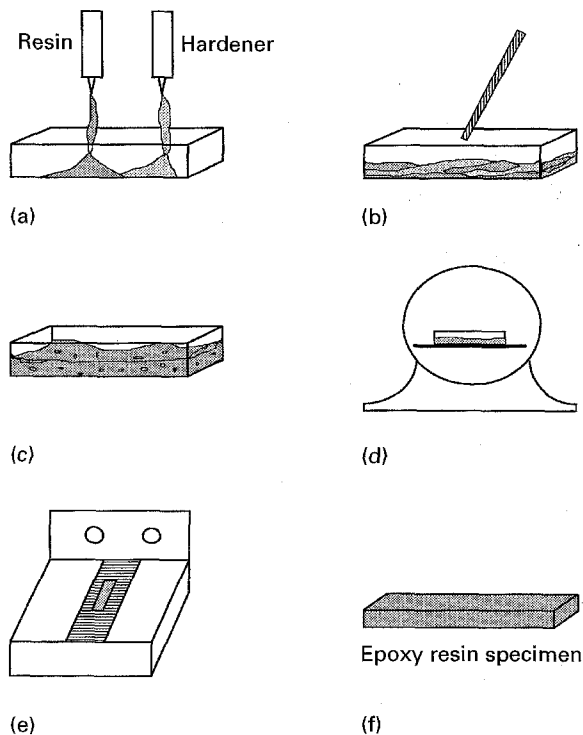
Schematic drawings showing the fabrication process for epoxy resin specimen: (a) squeezing resin and hardener into the mould, (b) mixing, (c) uncured epoxy resin containing pores, (d) removing pores by vacuuming, (e) grinding off the mould, and (f) the resulting epoxy resin specimen.
